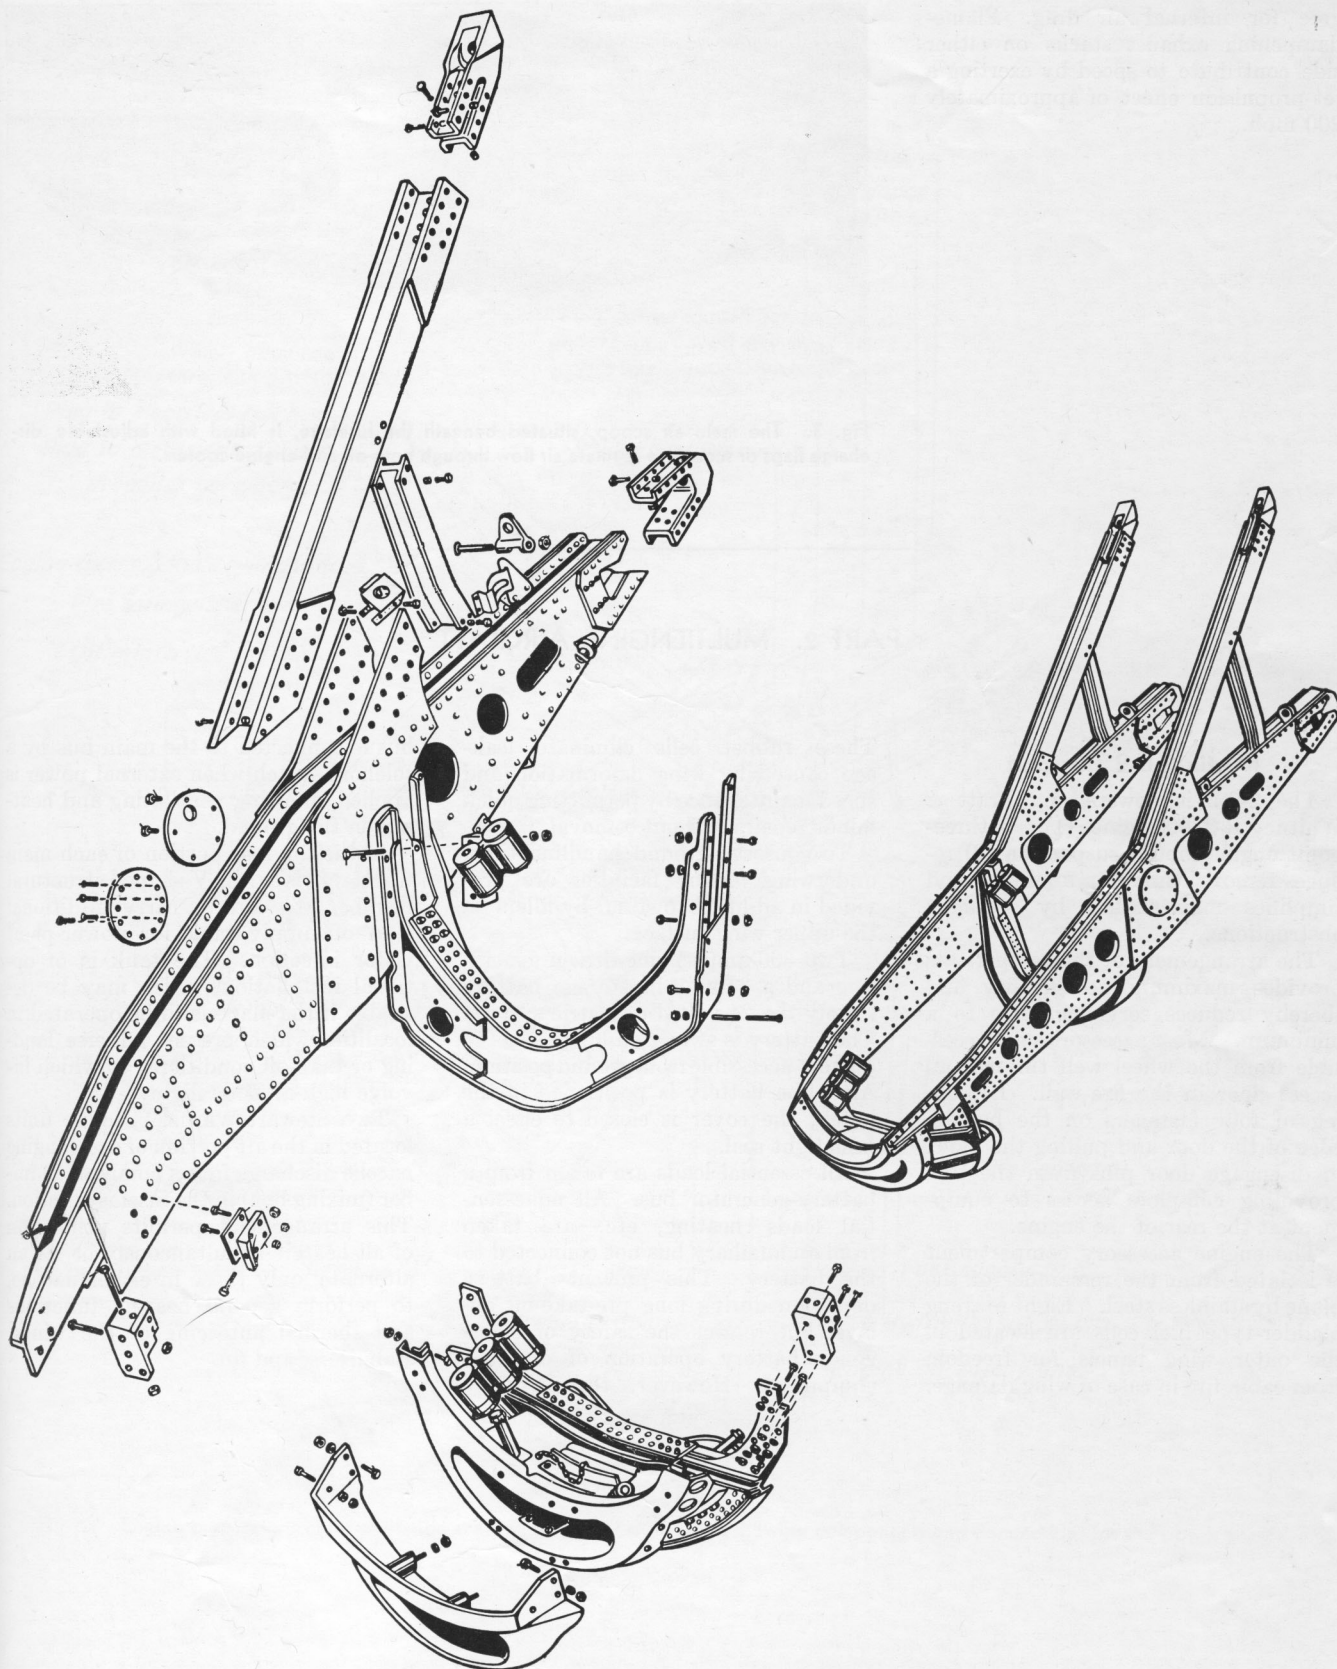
Structural design details of the engine-mount frame of the P-51.
